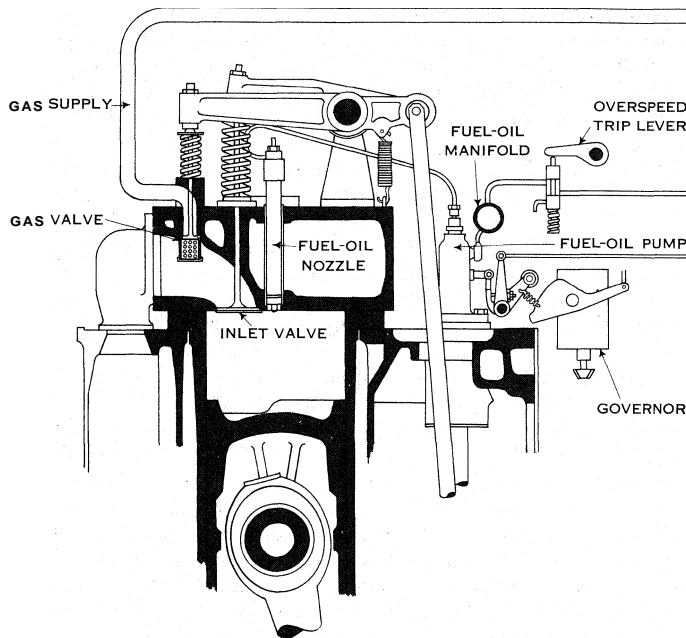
SECTIONAL VIEW OF A FOUR-STROKE-CYCLE, DUAL-FUEL DIESEL ENGINE
